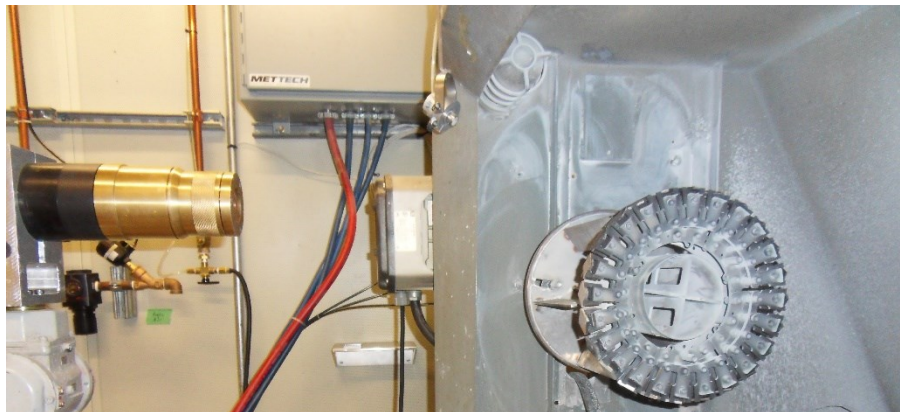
Axial-III plasma torch on a 6-axis robot in front of a rotating sample holder.
